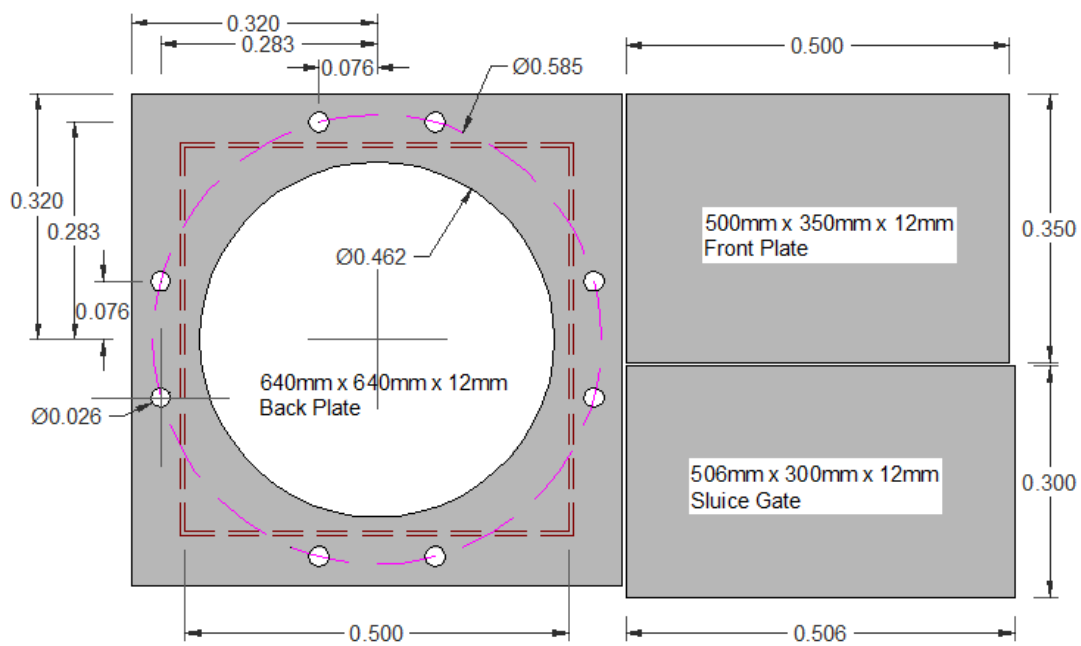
FINAL STEEL JET BOX DESIGNS SENT TO MACSTEEL FOR CUTTING
